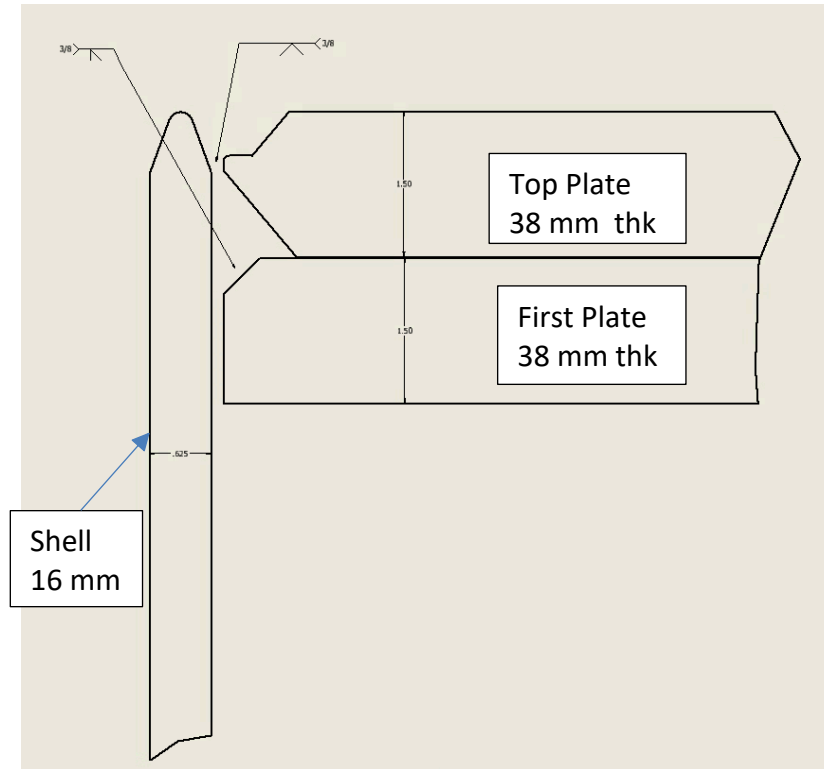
DSC lid-closure weld configuration. (Courtesy of INL)
